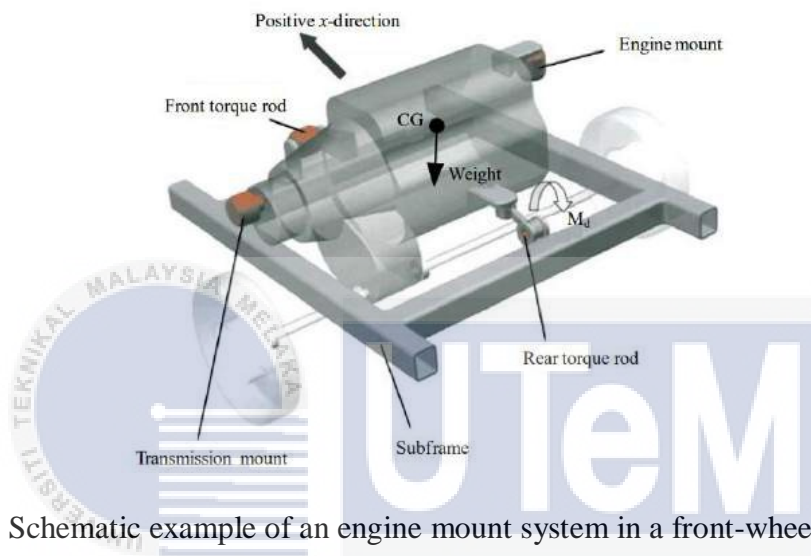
Schematic example of an engine mount system in a front-wheel drive vehicle
